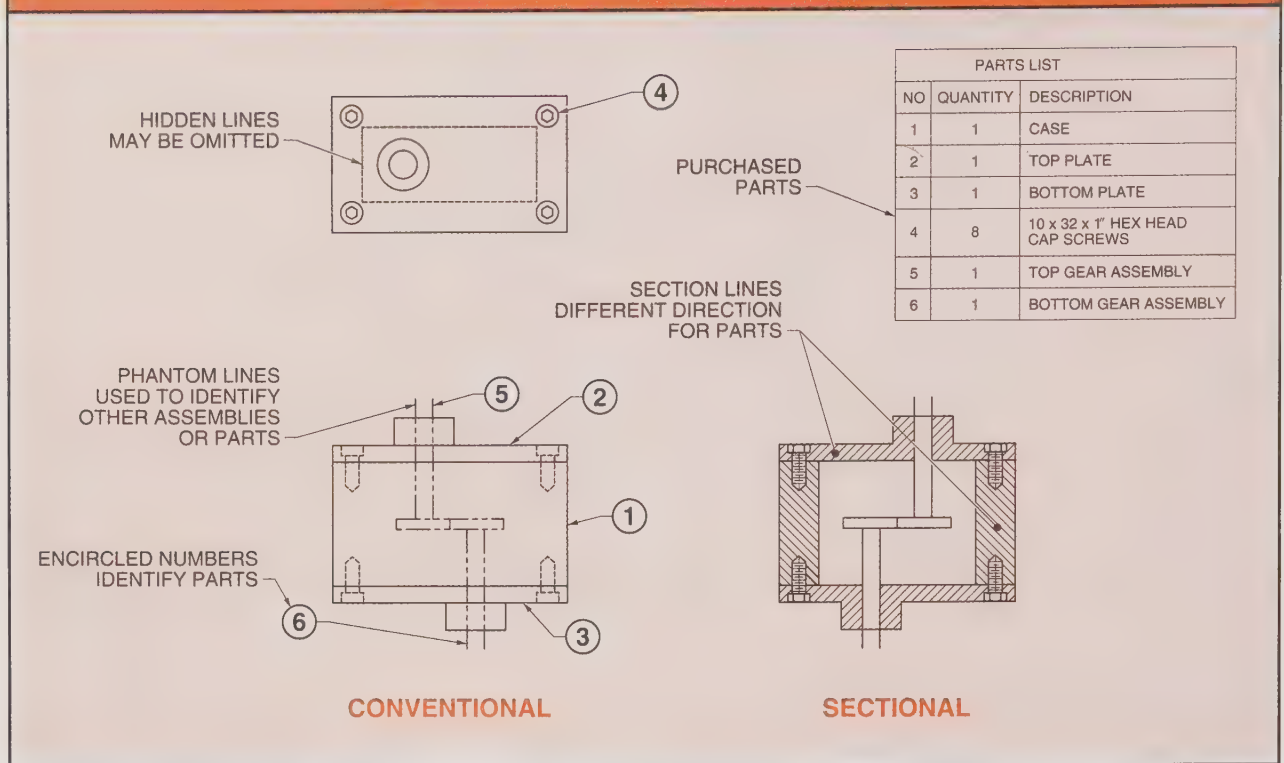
Orthographic assembly prints show conventional and/or sectional views of the object.
